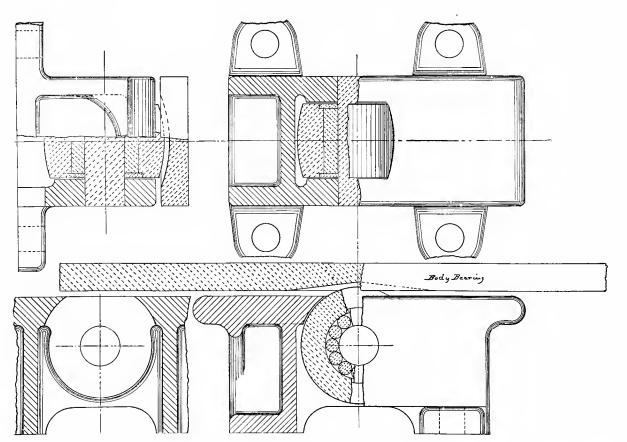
Perry Pocket Side Bearing. Joliet Railway Supply Company.
